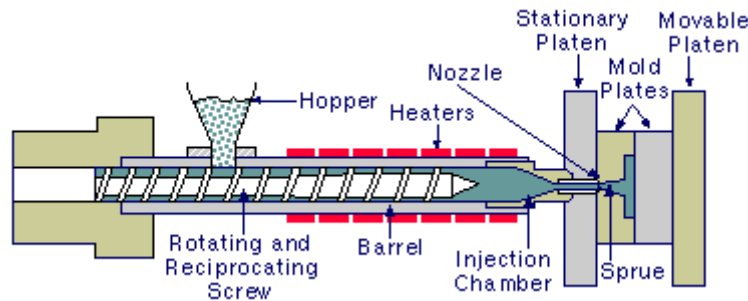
A single screw injection molding machine for thermoplastics, showing the plasticizing screw, a barrel, band heaters to heat the barrel, a stationary platen, and a movable platen.
